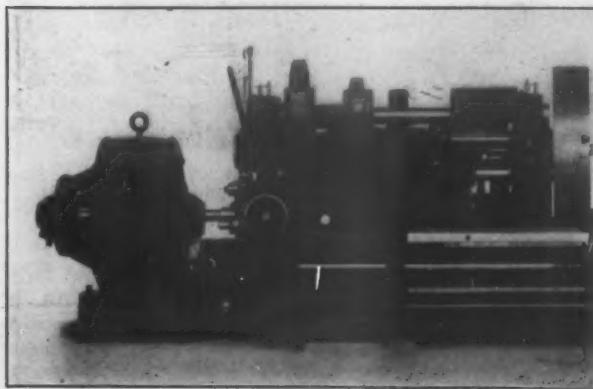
Partial Gear Guards for 36-in. Headstock.
